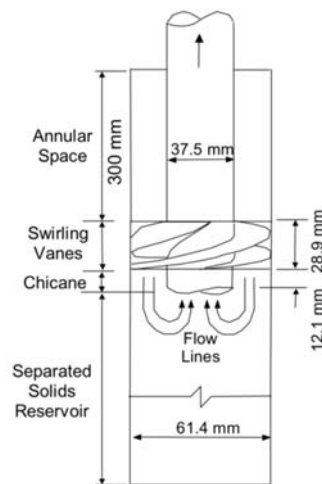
Swirl Tube Separator (Martins, J.A., Rosa, E. S., Souza, R., 2005)
